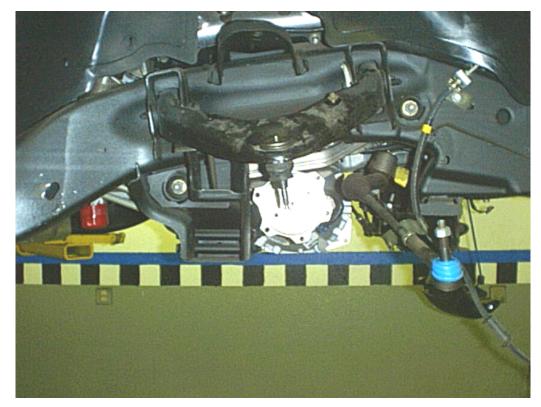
Lower control arms, CV axles, brake calipers, and spindle assemblies removed.
